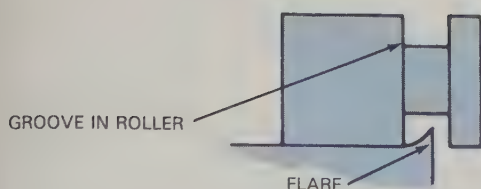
A groove in the roller of the tubing cutter permits you to cut off just the flare, so tubing is not shortened any more than necessary. (Imperial Eastman)
